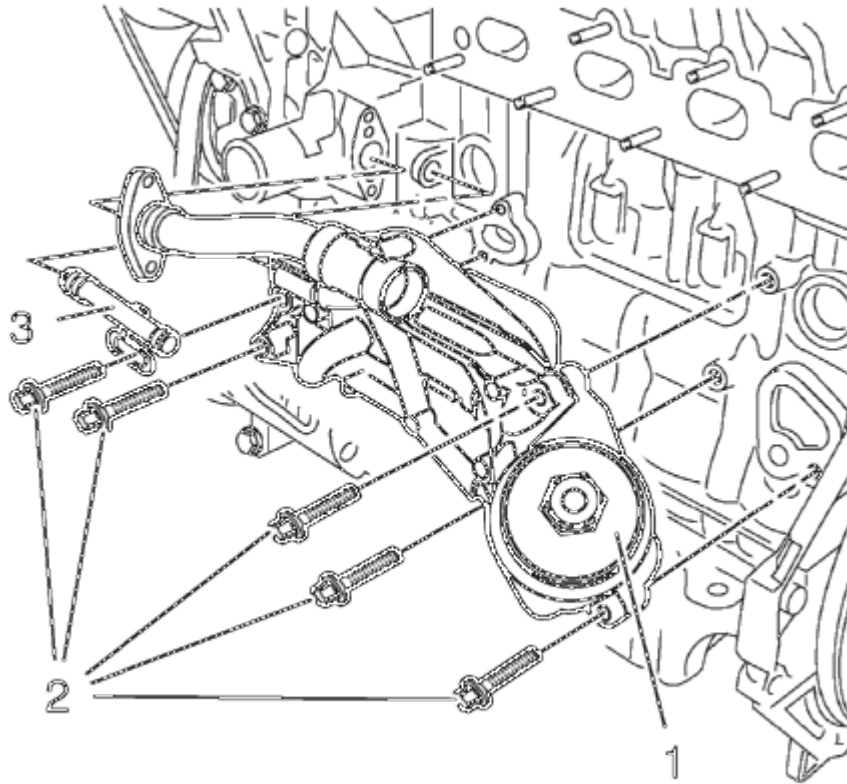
Identifying Engine Oil Cooler Housing, Bolts And Engine Oil Cooler Inlet Pipe
